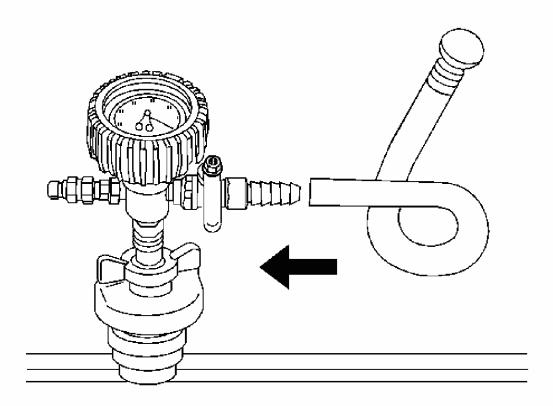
Attaching The Fill Hose To The Barb Fitting On The Vacuum Gage <u>Assembly</u>
